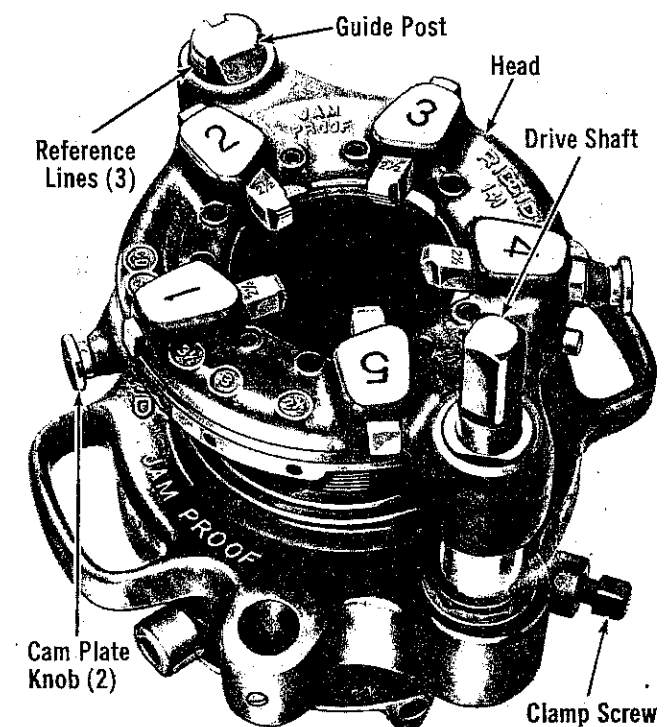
No. 141 Geared Threader with Drive Shaft Up (No. 161 Threader Similar).
